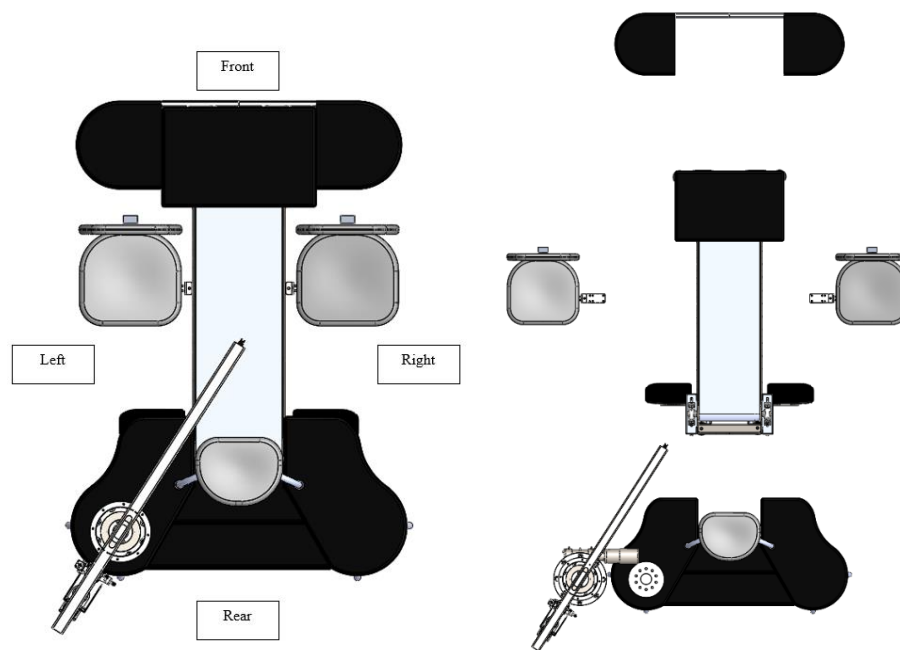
Top view of system showing orientation (left) and exploded view (right)
